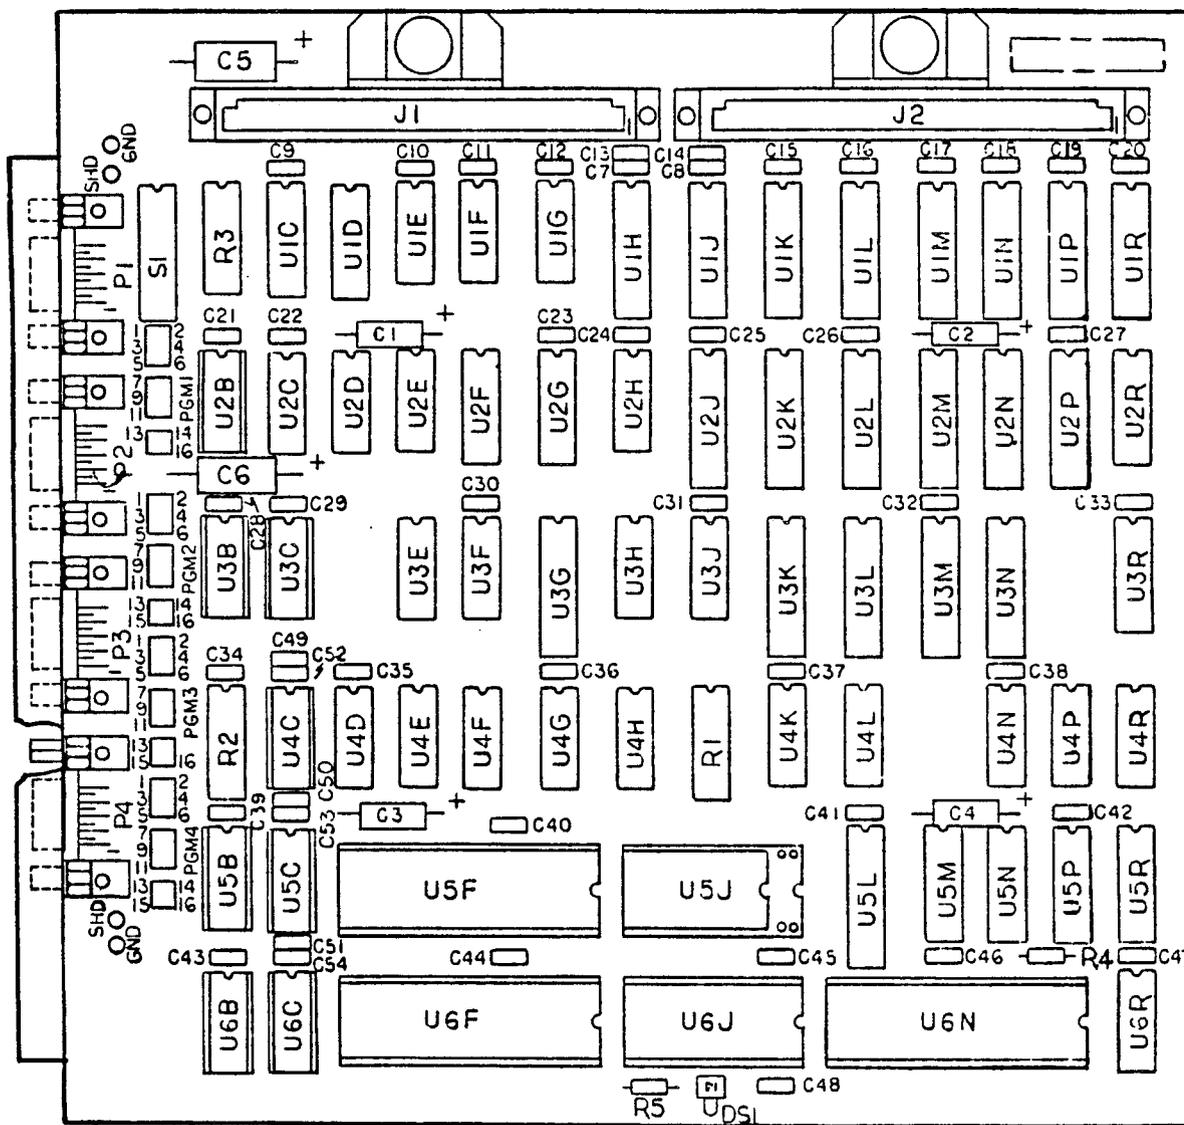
4-Way Controller PCBA (P/N 903390)
